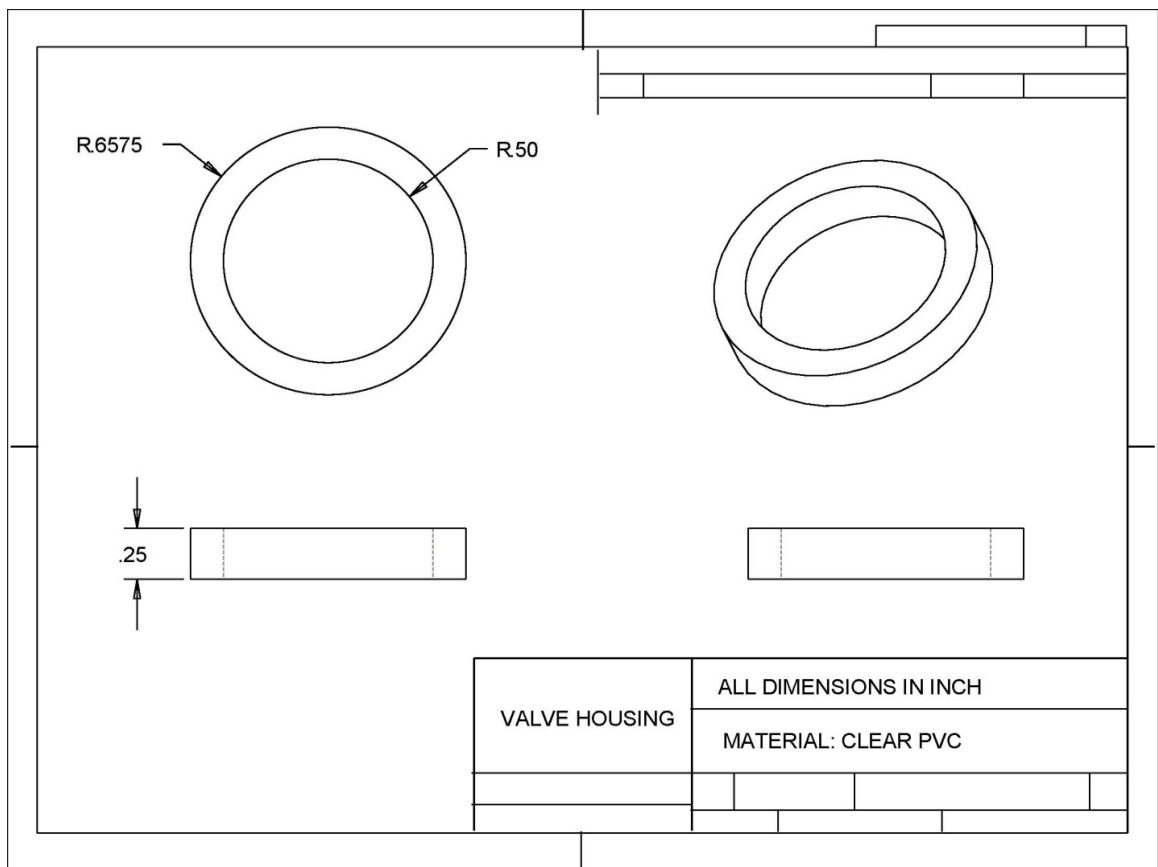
2D CAD model of valve housing with dimensions and top, front, right hand and isometric views.
